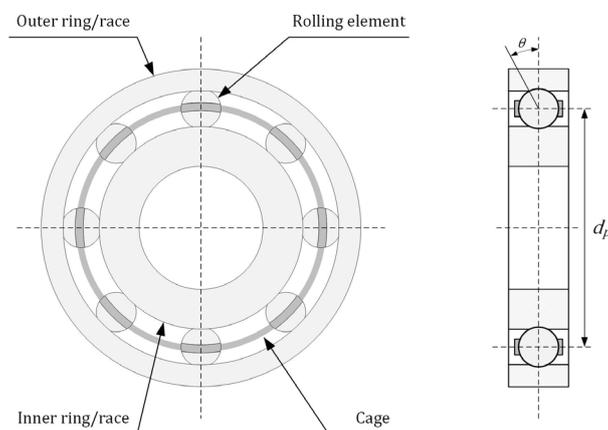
Bearing construction elements and cross section view; (Source: Authors).
